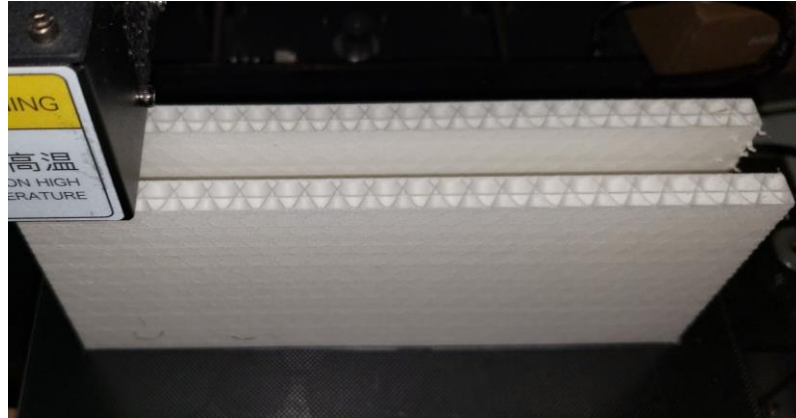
3D printing of the plate pattern in progress showing the infill geometry.
